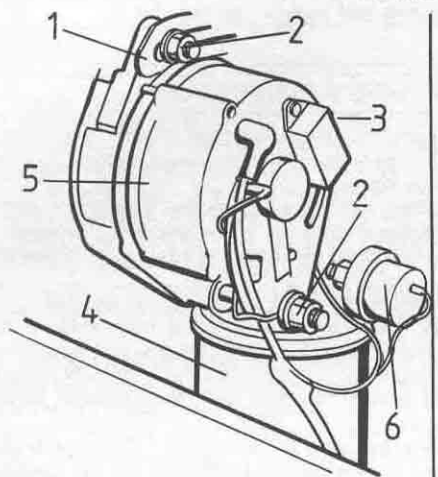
View of alternator with the grille removed (Saloon models) (Sec 7)
